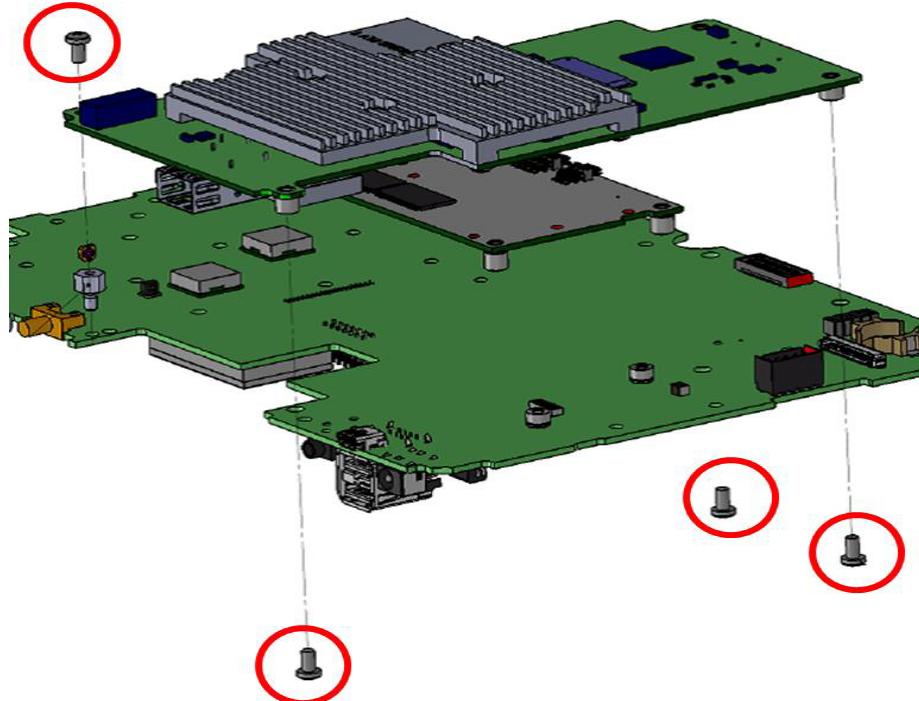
Removing the GPS PCB from the Motherboard (SPA PCB already removed)
